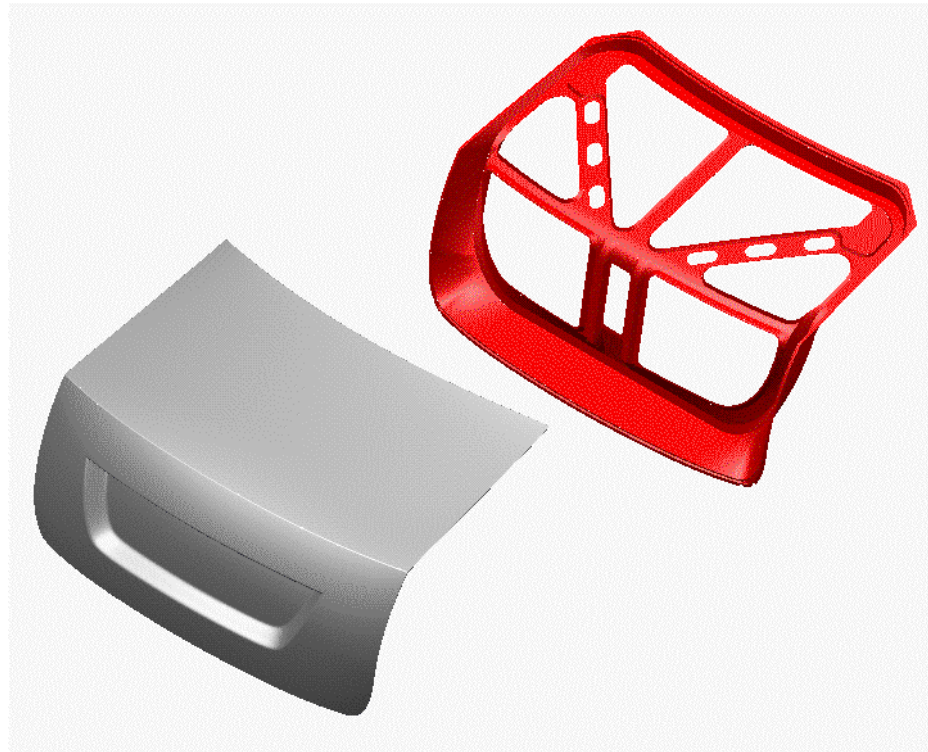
Exploded view of PNGV-Class decklid structure
